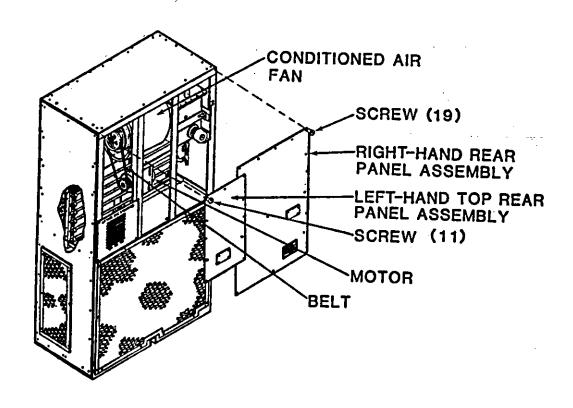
Conditioned Air Fan, Motor(B1) and Belt Access
